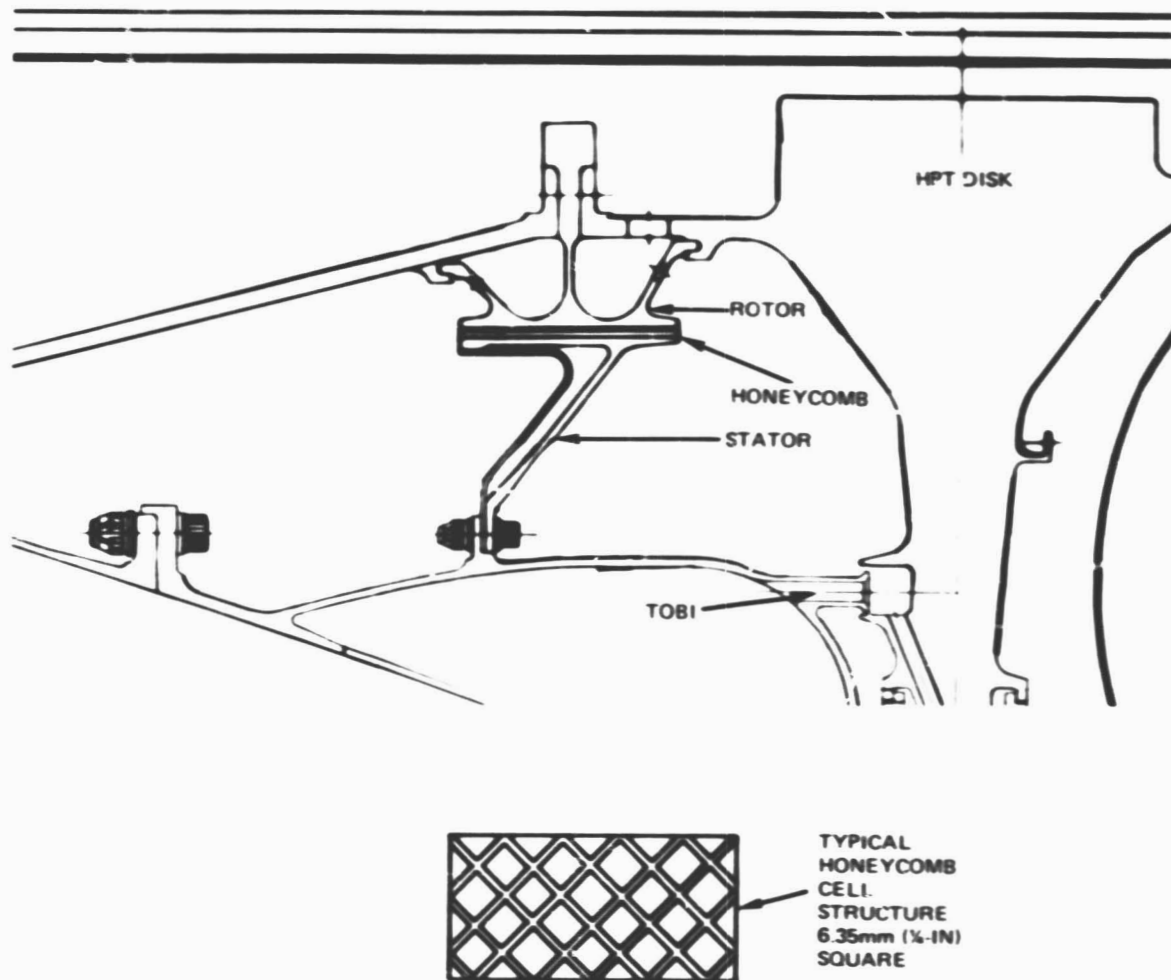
Wide Channel Seal. Schematic drawing shows design features.
